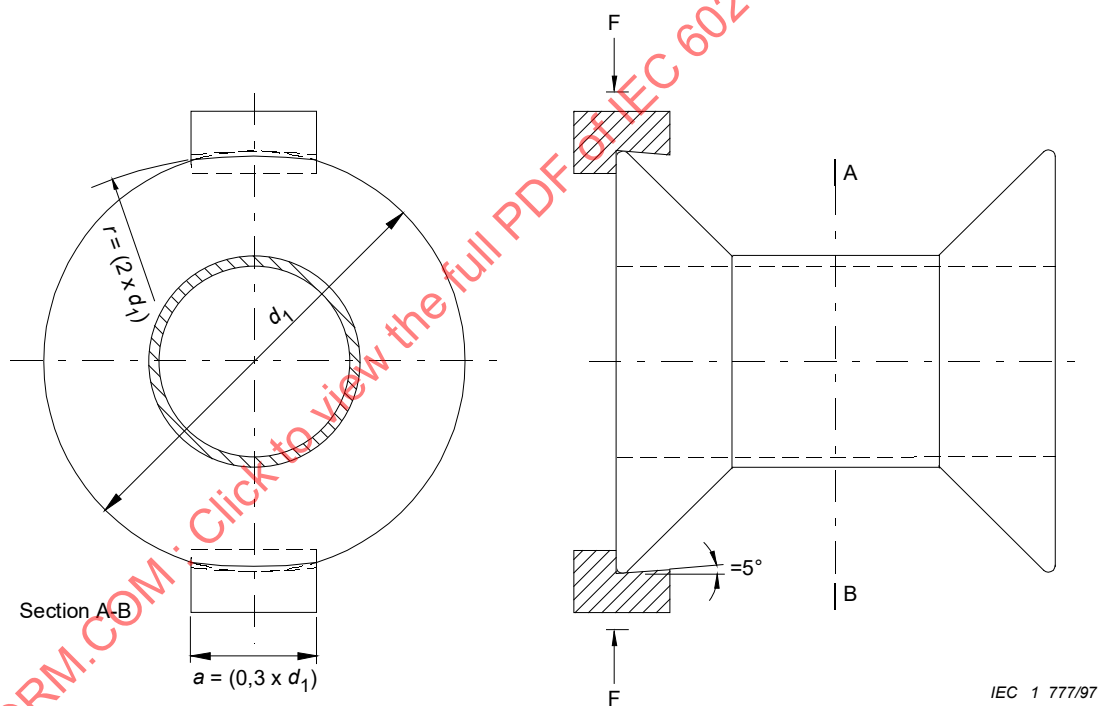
Crushing testing jig for flexibility test (conical flanges)
